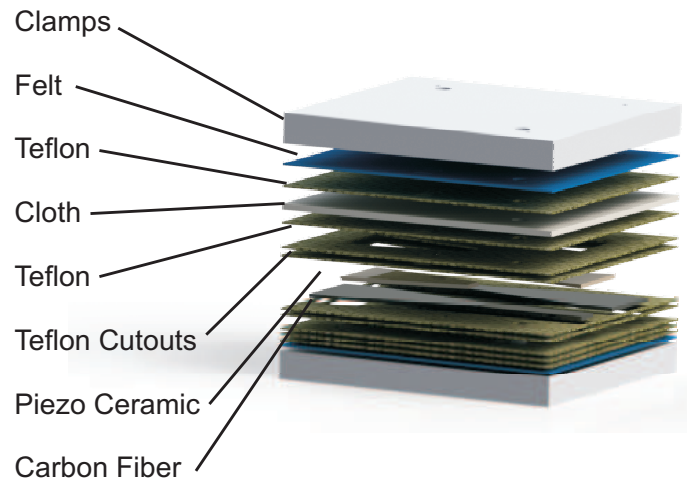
Actuator assembly, method two. Top half called out; bottom half symmetric.
